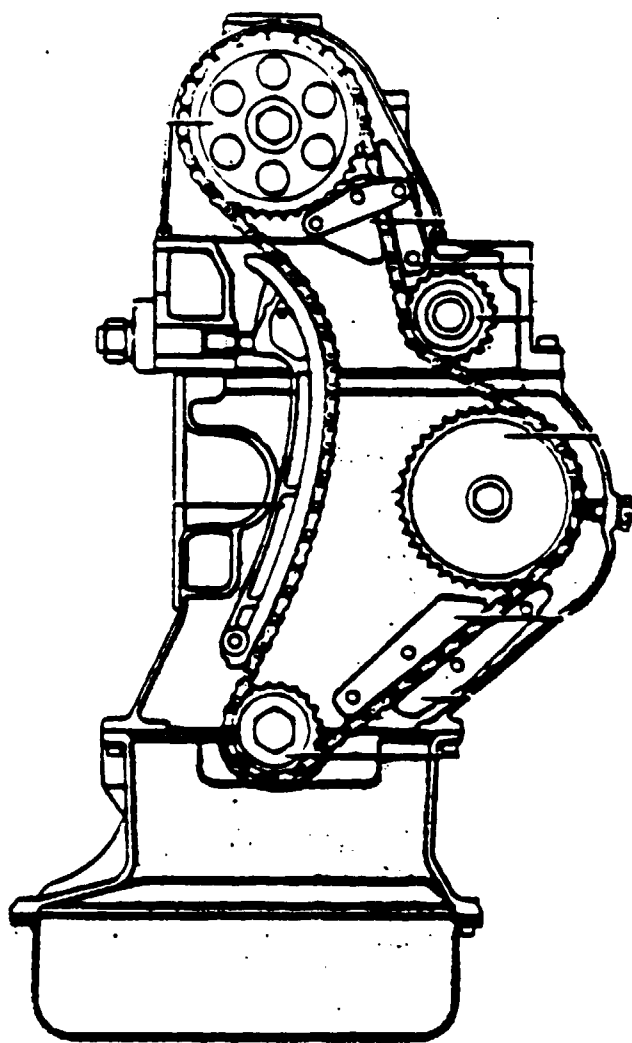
OM 617 Chain Drive (Ref. 16)
